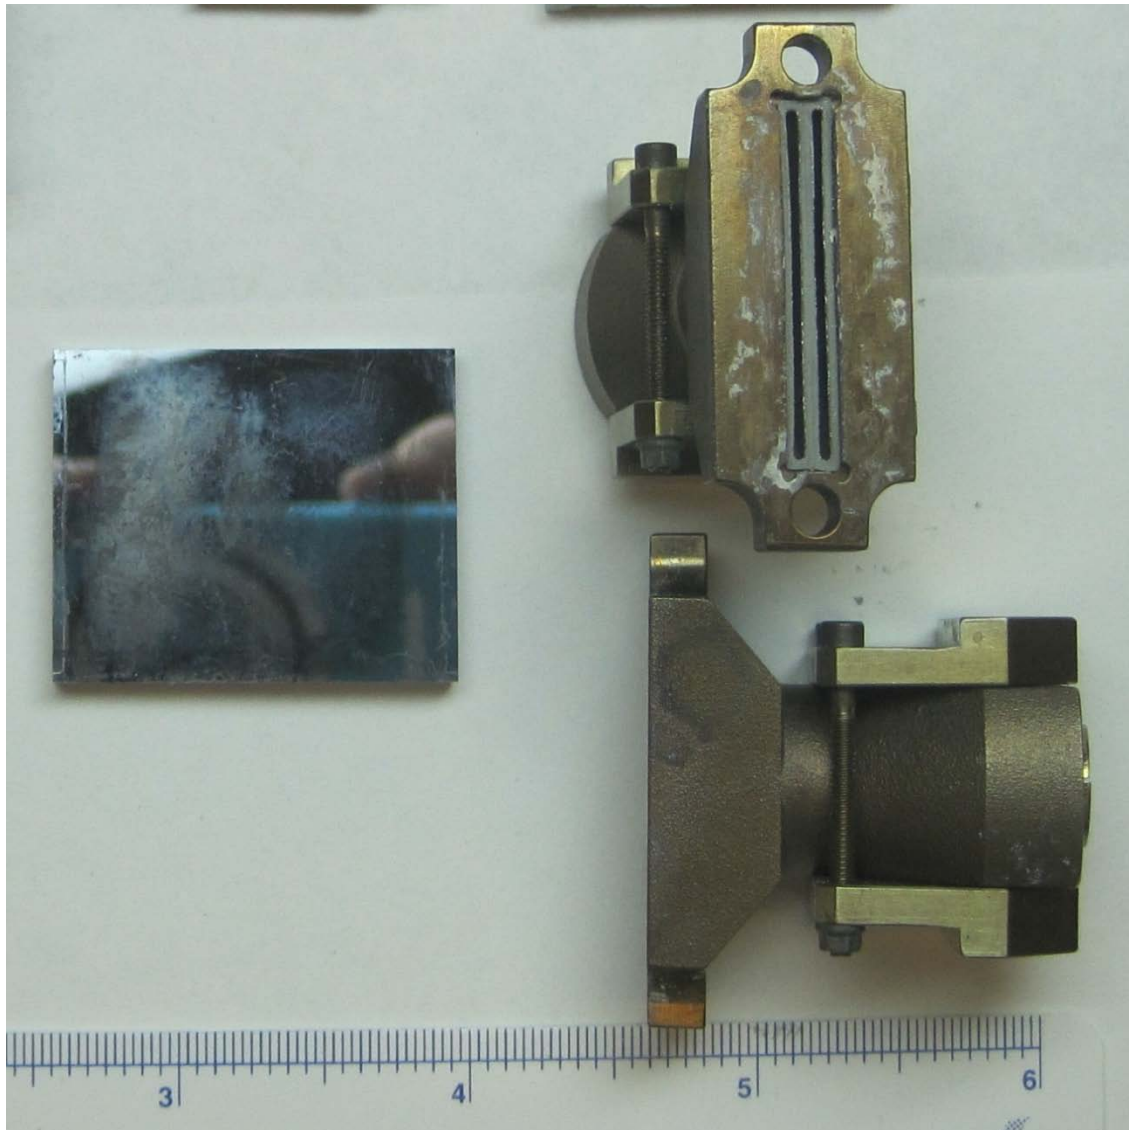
Gas distribution manifolds, aluminum gasket, and 35-mm-long silicon combustors. Scale on ruler is in inches. The gasket can be observed inside the recess of one of the manifolds.
